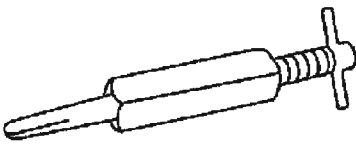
Installing A/C Clutch Disc And Hub Retaining Bolt
